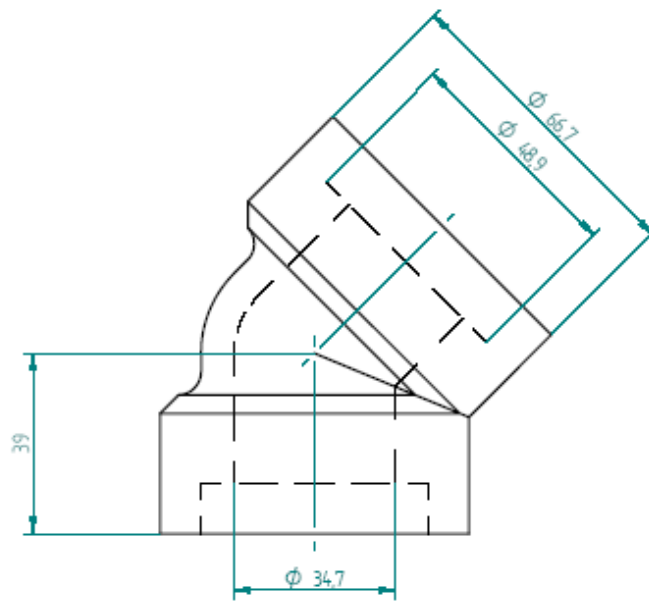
A dimension of a 45-degree socket welding elbow
